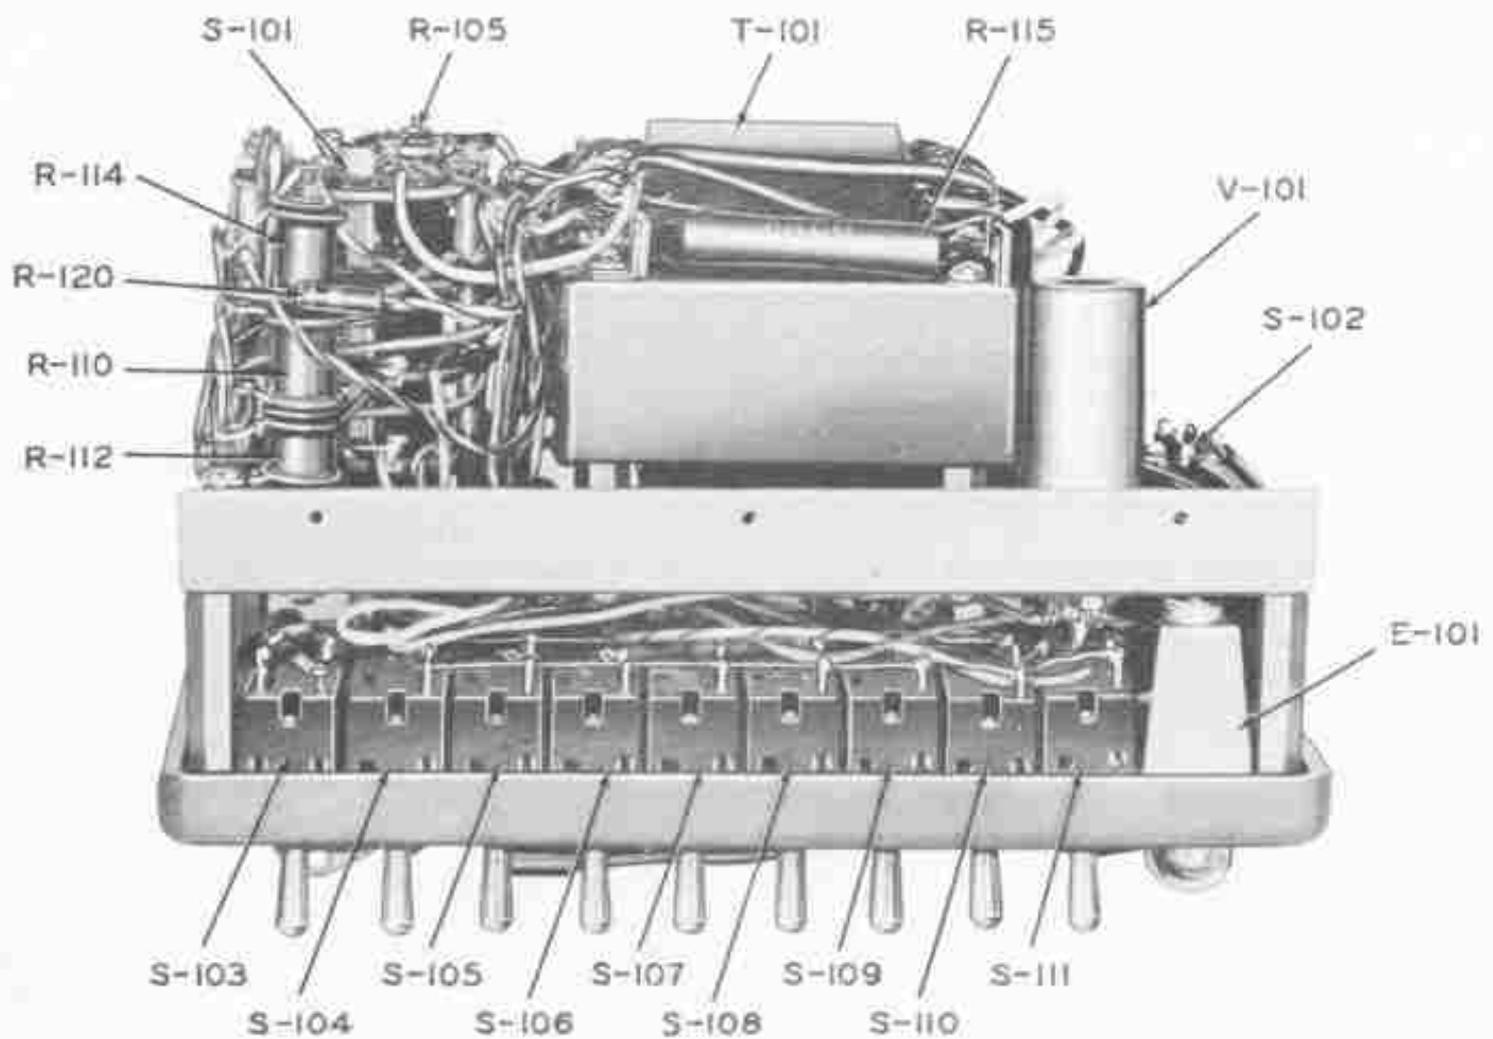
Side View of Tube Tester TV-4A/U, Case Removed
